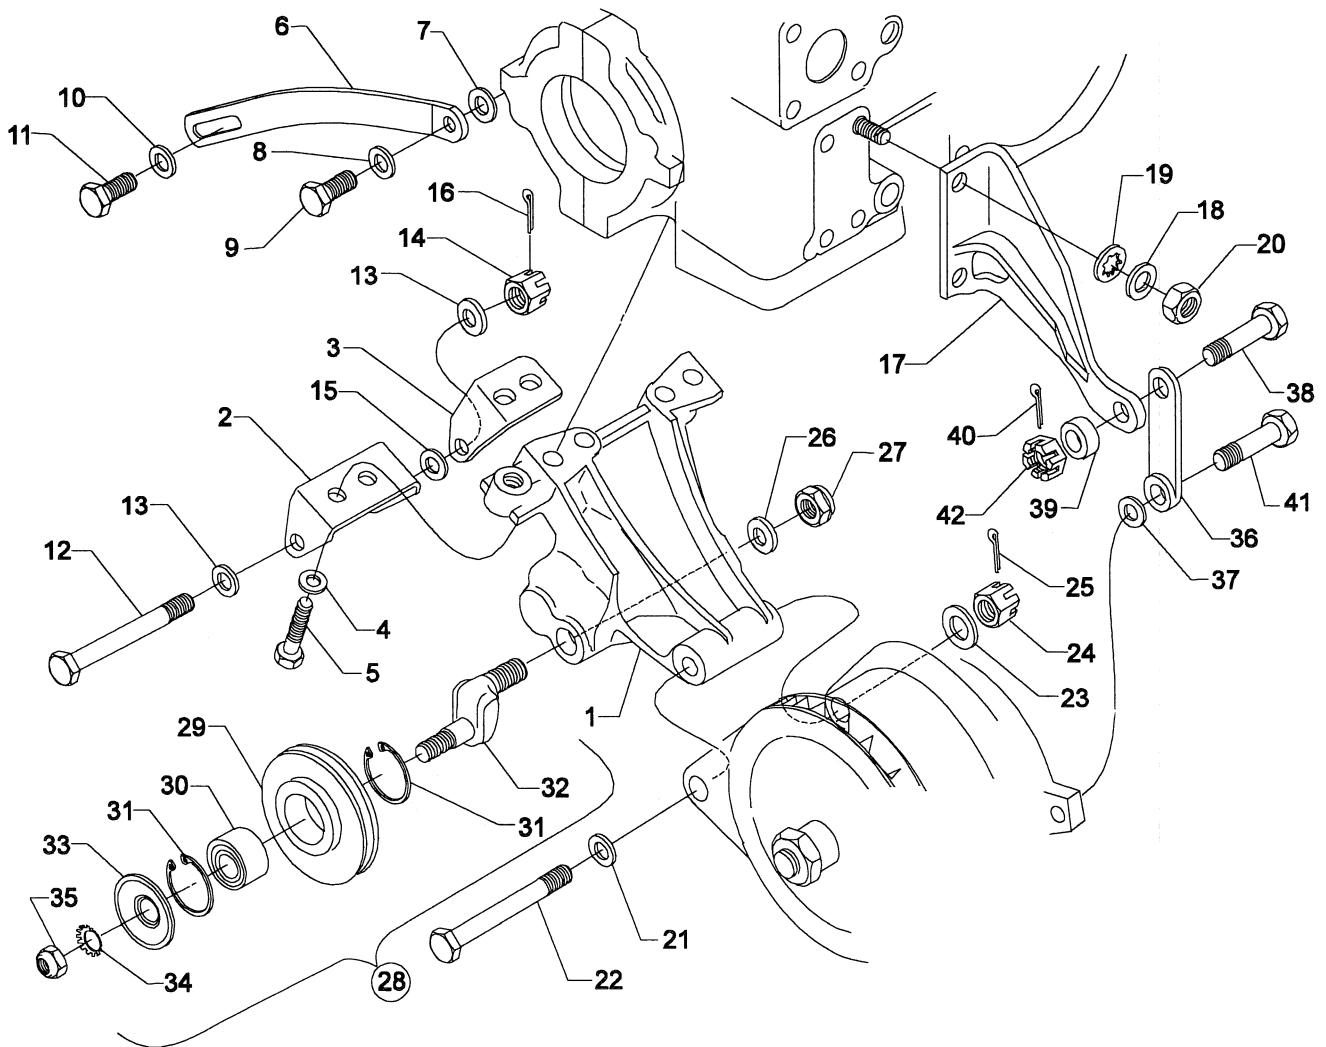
(DUAL) ALTERNATOR MOUNTING AND ATTACHING PARTS
